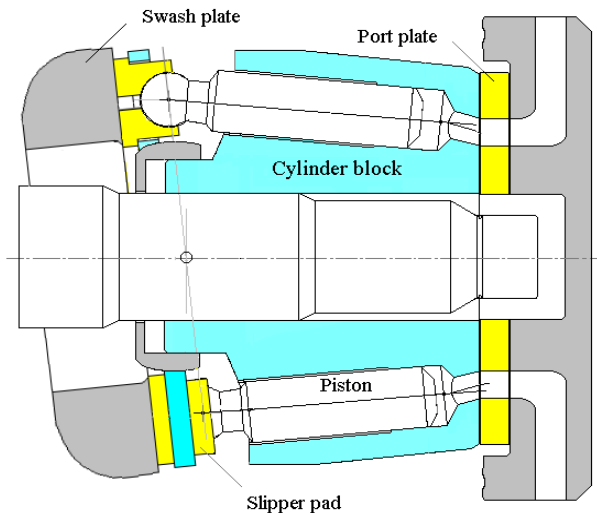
Variable geometric displacement volume swash plate axial piston pumping mechanism with conical cylinder block
